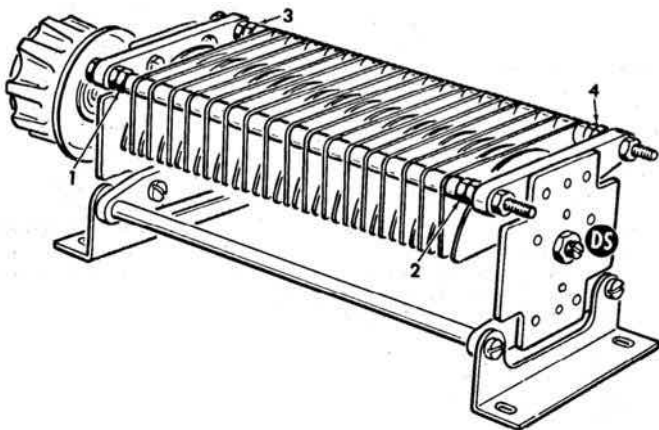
Completed C2 showing plate spacing adjustments; from Heathkit Manual.
